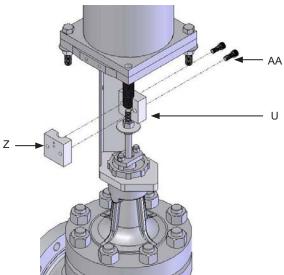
Finish the Rod Clevis Assembly with two Socket Head Cap Screws.
